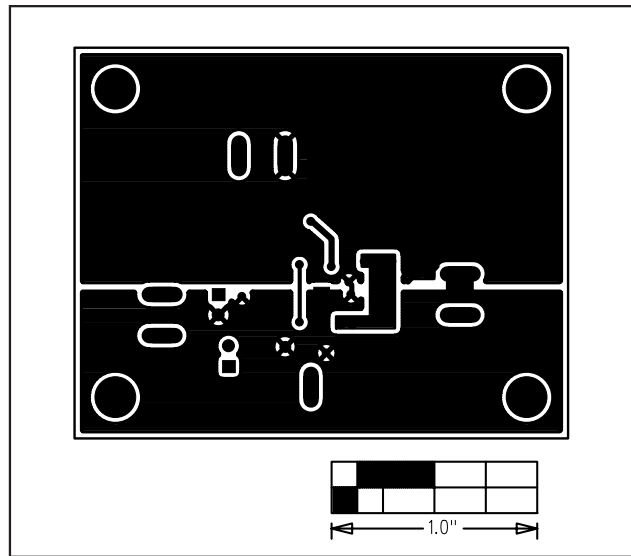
MAX1926 EV Kit PC Board Layout—Solder Side
